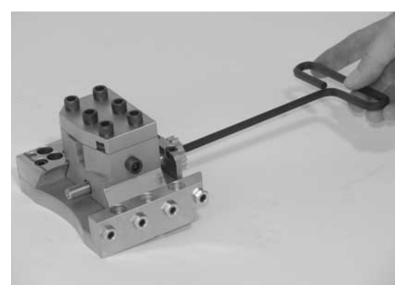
Check the tension on the slide by driving it to both ends of the feed screw.
